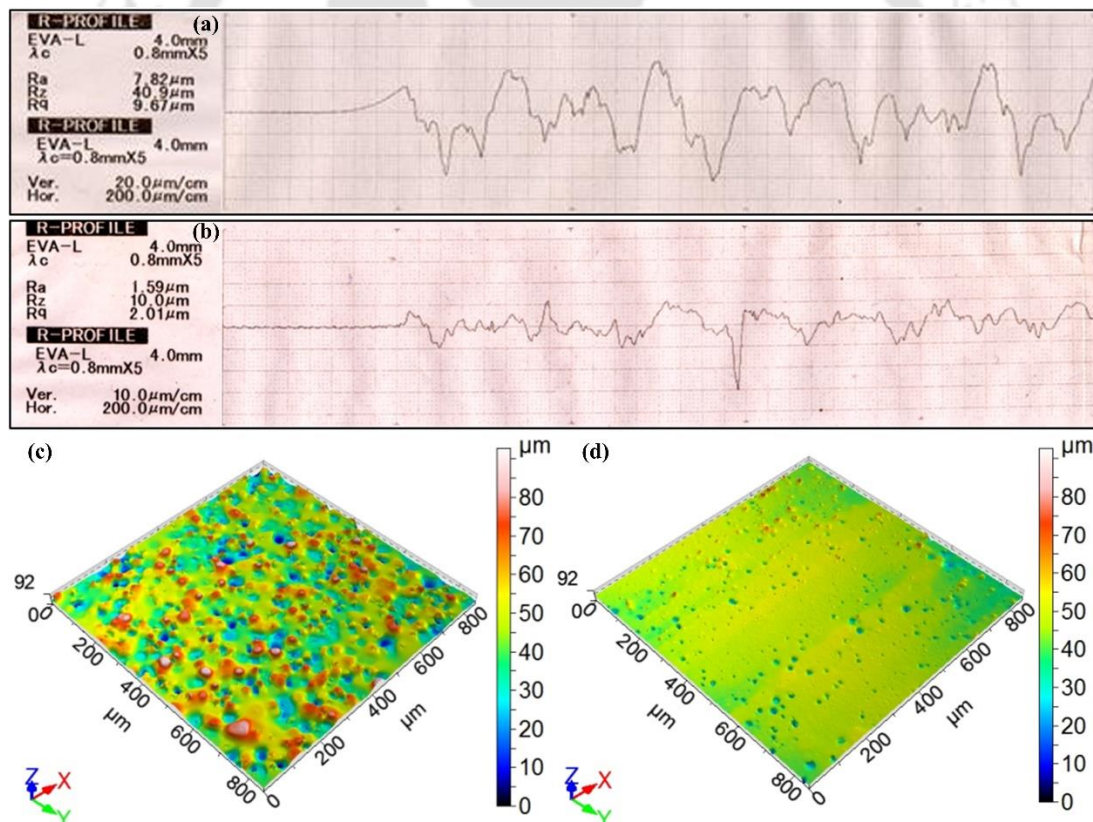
Surface roughness of the test gear tooth (a) Before and (b) After testing, and 3D view of the gear tooth surface (c) Before and (d) After testing
